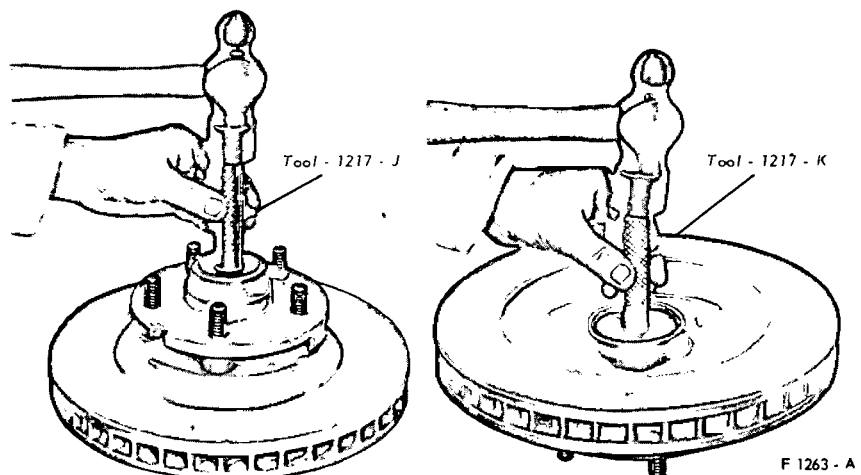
Installing Front Wheel Bearing Cup—Disc Type
